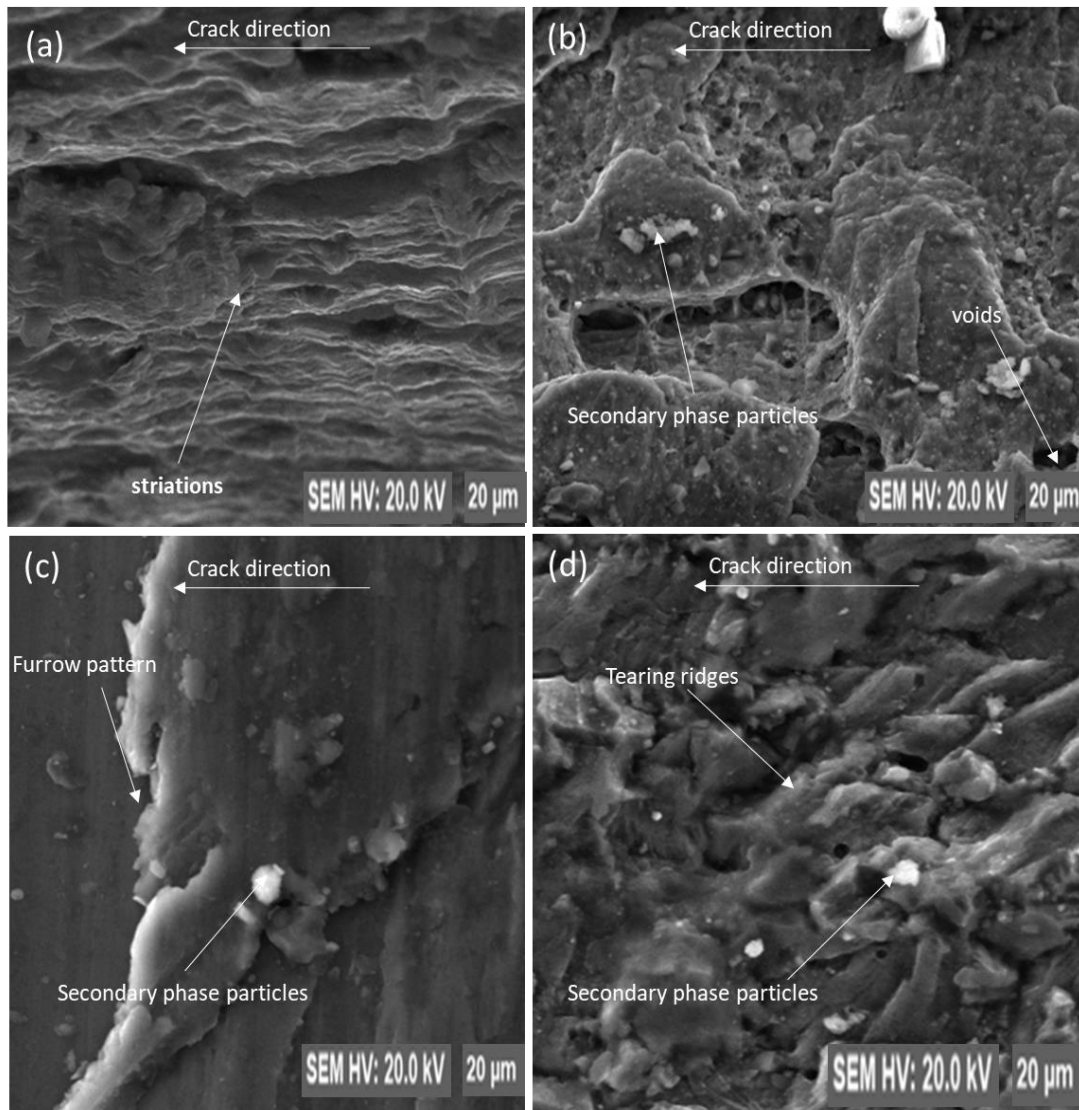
Final fatigue fracture morphology of Al alloy, (a)7075-O countersunk rivet hole,(b) 7075-O perpendicular rivet hole, (c)7075-T6 countersunk rivet hole, (d)7075-T6 perpendicular rivet hole.
